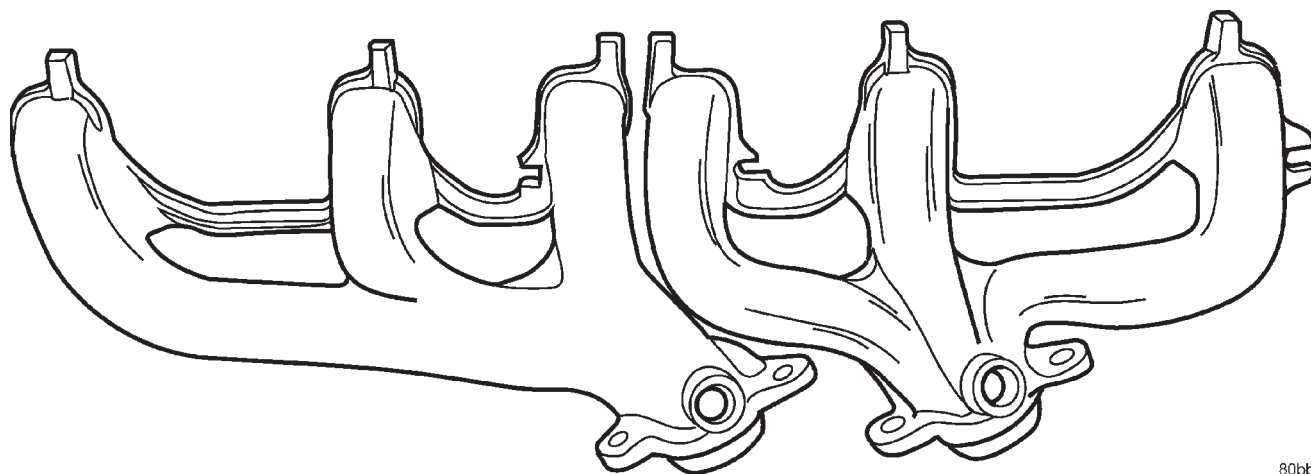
EXHAUST MANIFOLDS 4.0L ENGINE
